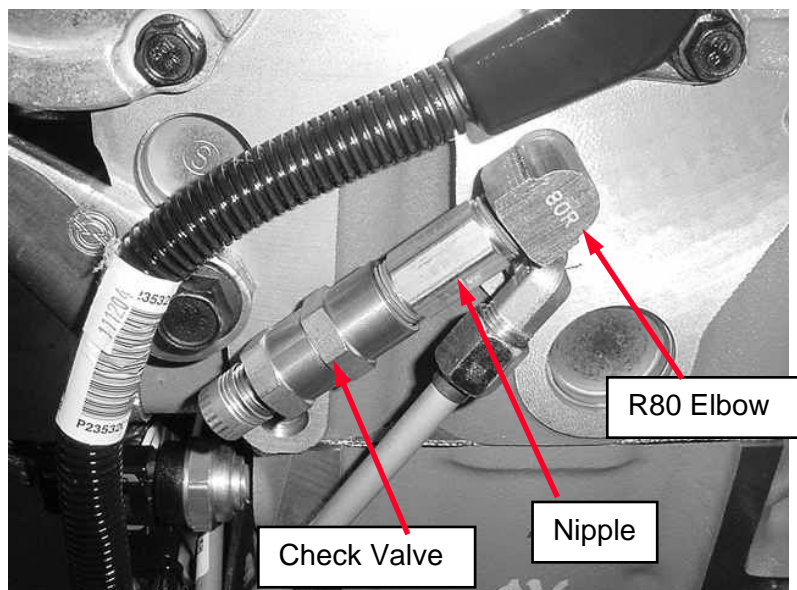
Former Check Valve, R80 Elbow, & Nipple
